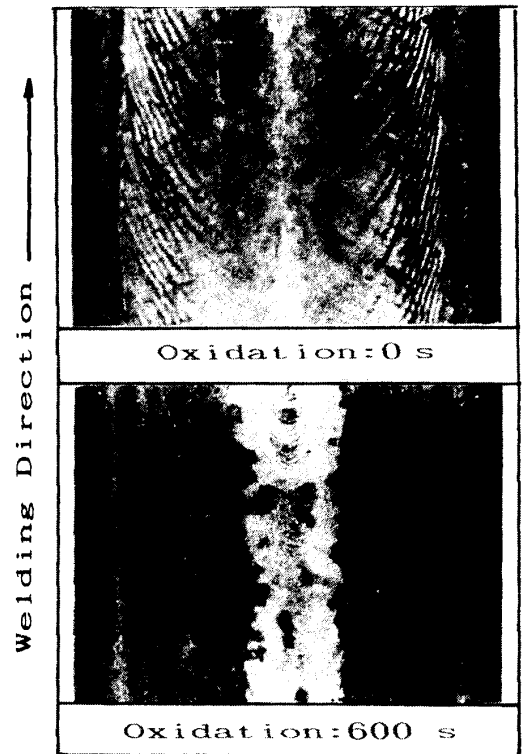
Examples of appearance of bead surface welded with 190 A (heat input; 11.9 kJ/cm).
